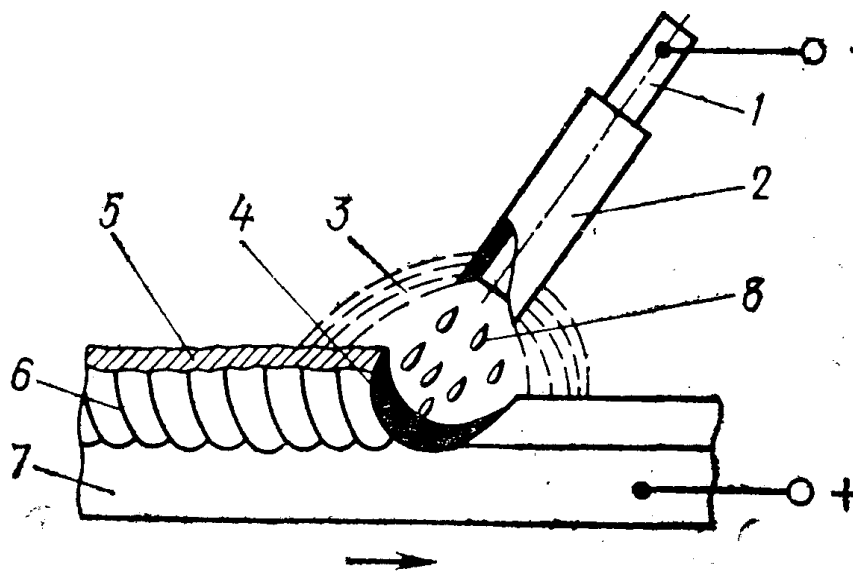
Manual arc welding with a coated metal electrode (arrow shows welding direction)
